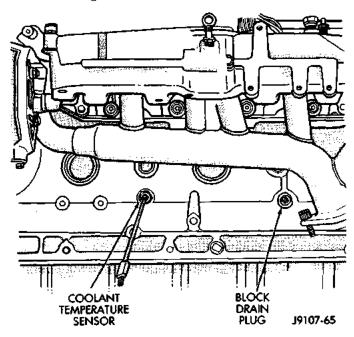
Draining Coolant—4.0L 6-Cylinder Engine
